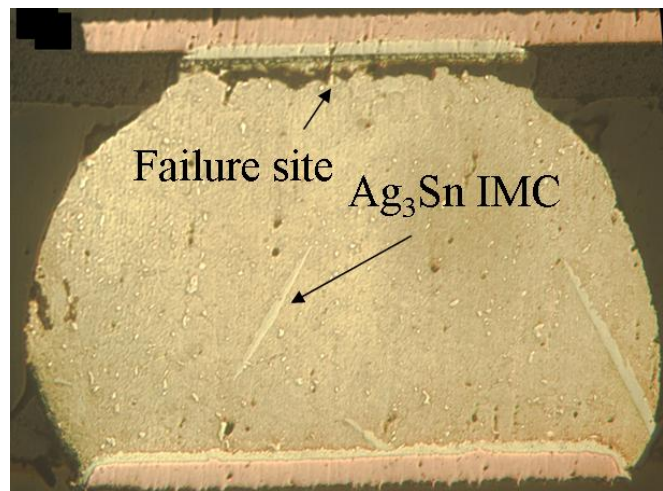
BGA (SnAgCu)-SnAgCu solder-ImSn finish-aged--failed ball shows failure on the component side.
